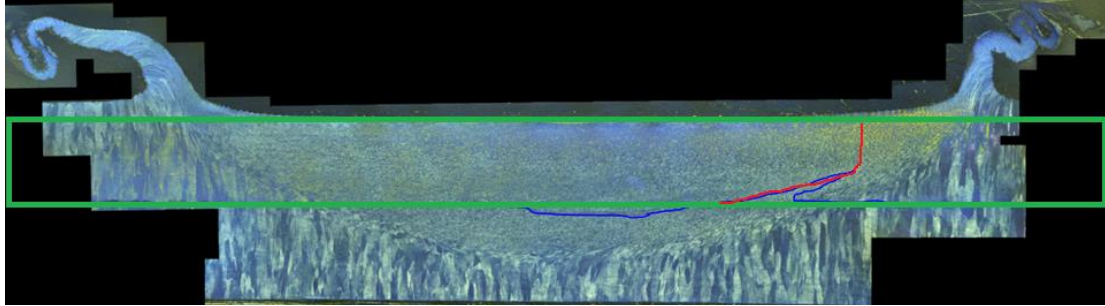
Cross-section of second 400 rpm weld, fracture surface of high temperature tensile test marked in red.
